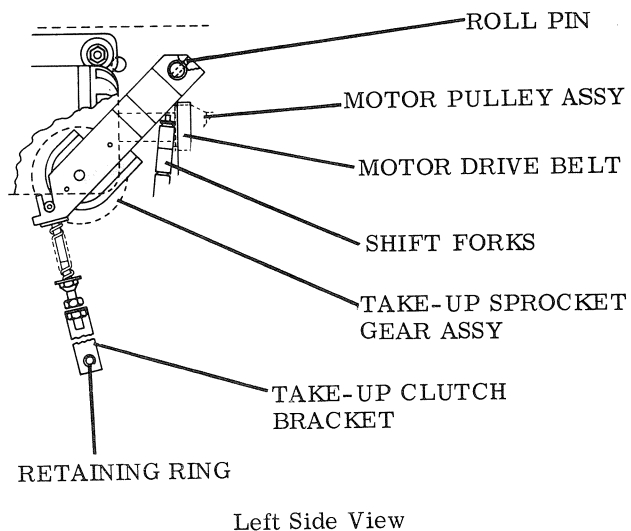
TAKE-UP CLUTCH ARM TO PROJECTOR
